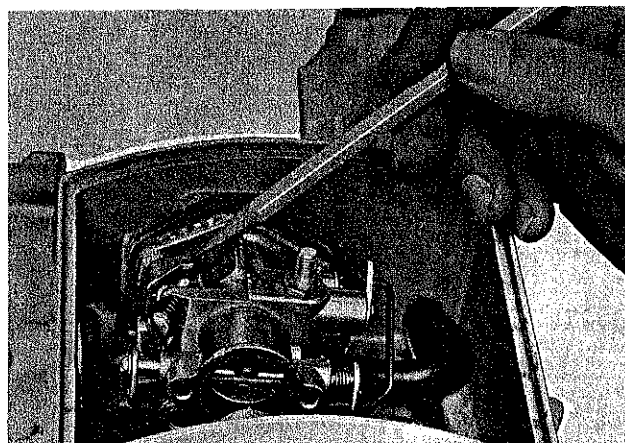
Checking the throttle lever to see that it opens fully when the throttle trigger is pulled. Note the throttle linkage and be sure there is no interference between throttle and choke rod.
